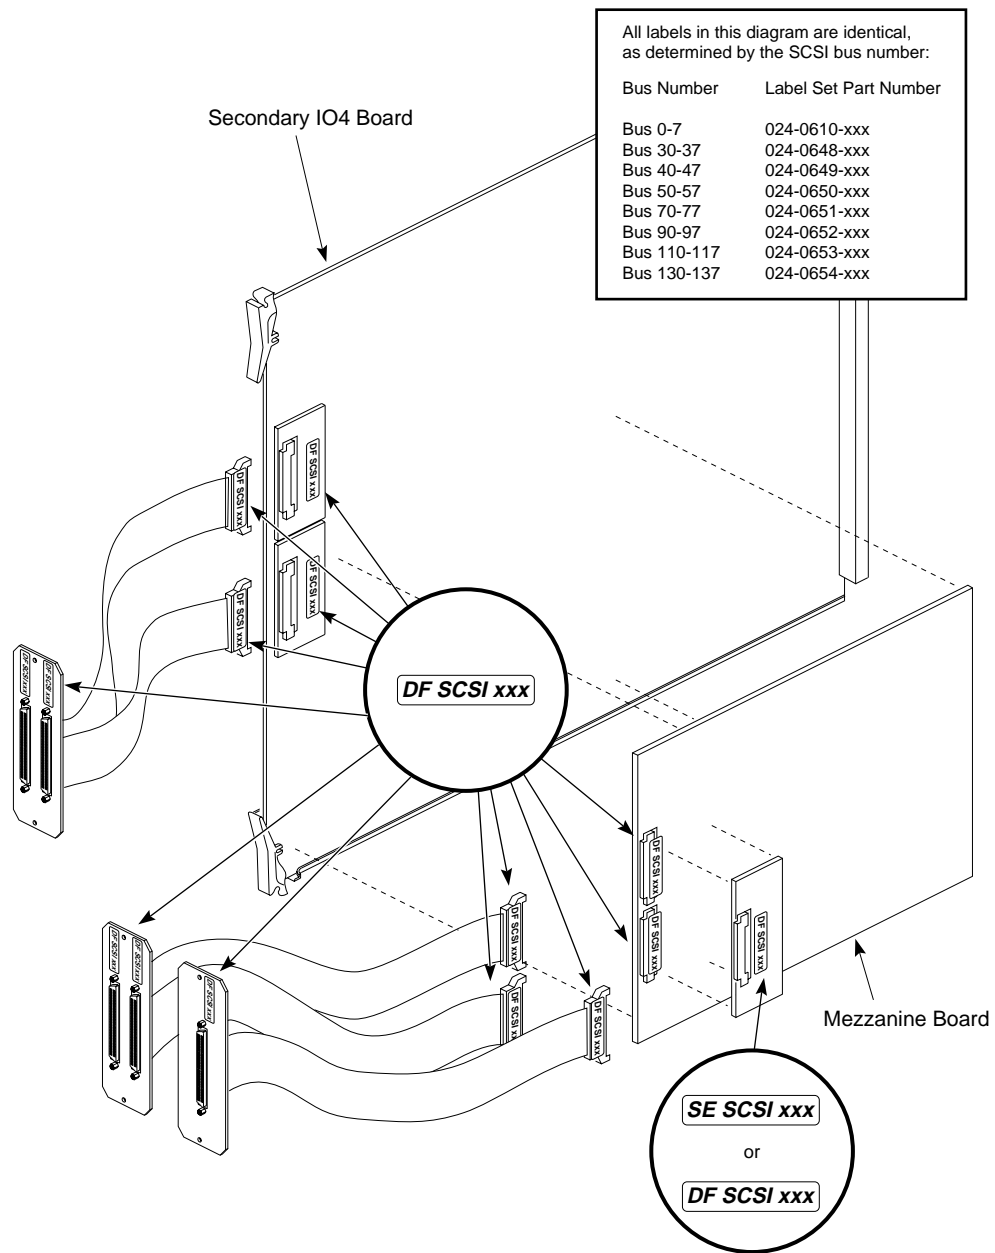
SCSI Label Placement for Secondary I/O Boards, Mezzanine Boards, and I/O Plates
